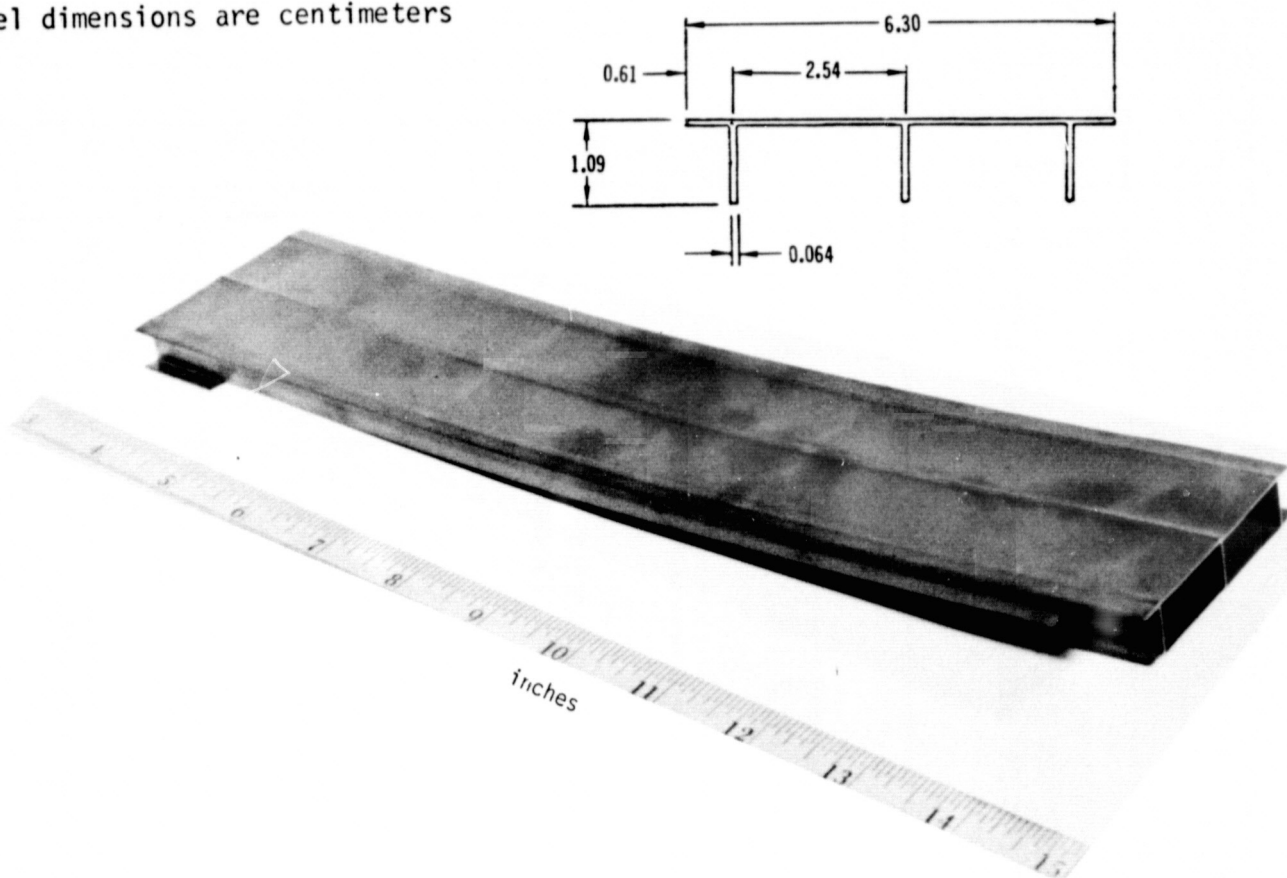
SUBSIZE PANEL L6 CROSS SECTION AND PHOTOGRAPH AFTER TEST
